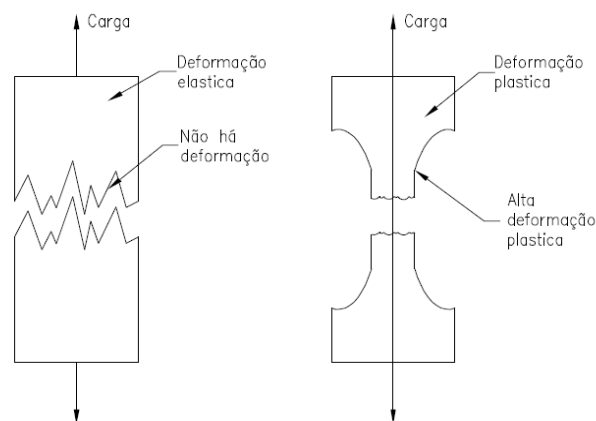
Types of fracture fragile fracture and ductile fracture (Rusinque Guatibonza, 2009).
